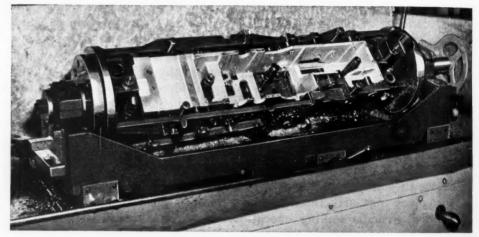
Nearly all of the drilling and some reaming operations are performed on five multiple-spindle machines that are connected by ways, along which the carriage, holding the casting in a fixture, is moved
